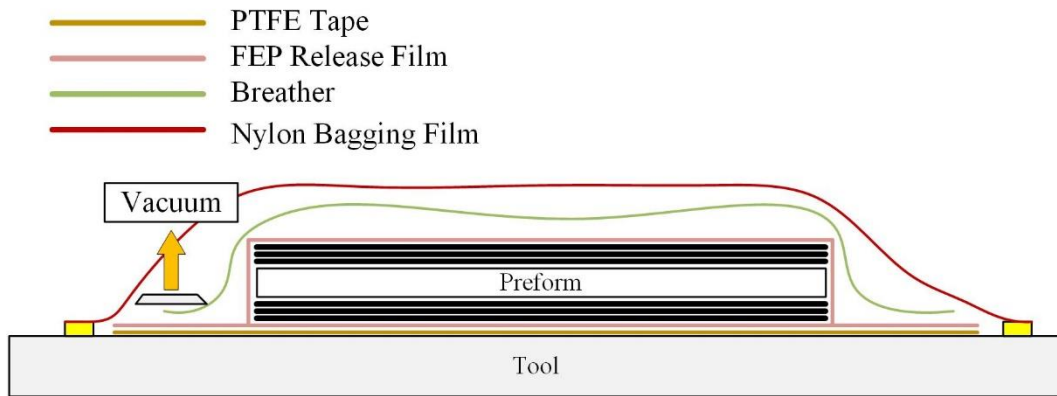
Vacuum bagging scheme for performing a debulk cycle on a sandwich preform.
